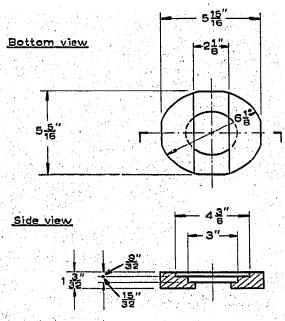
Adaptor. Bottom view and side view showing dimensions in inches.
